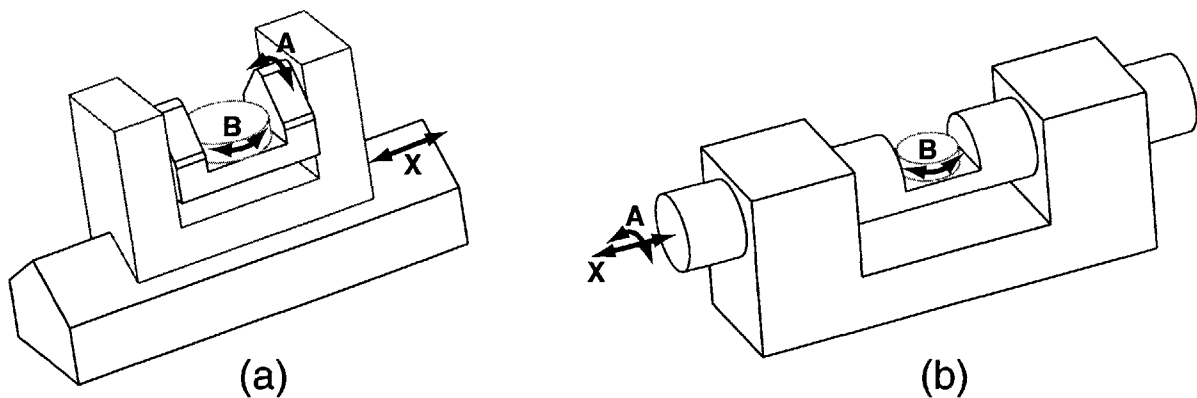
A common stacked-axis arrangement used in horizontal multi-axis machine tools is compared to our proposed rotary-linear axis. (a) Rotary index table (B) is mounted on a trunnion (A) which is moved by a linear axis (X). (b) Our rotary-linear (A - X) axis eliminates the conventional stacking of axes. Figure drawn by Marsette Vona.
